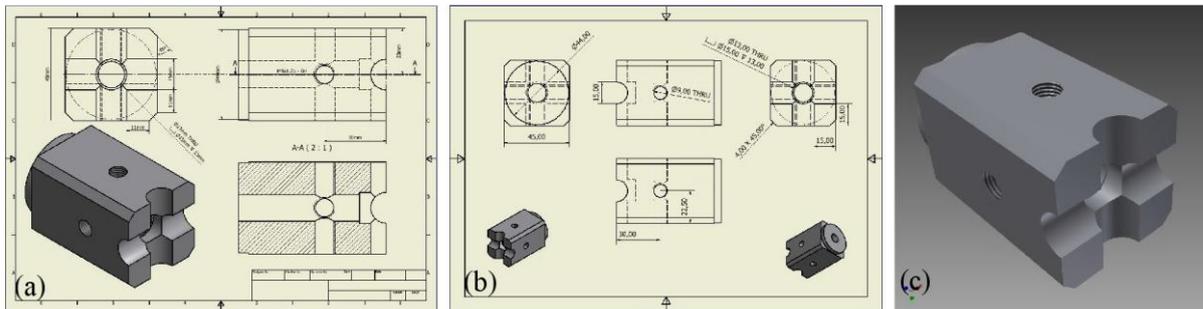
(a) Projection of the dimensional measurements, (b) Projection of the dimensional measurements (manufacturing details), (c) Moving blade: three dimensional presentation (3D).
